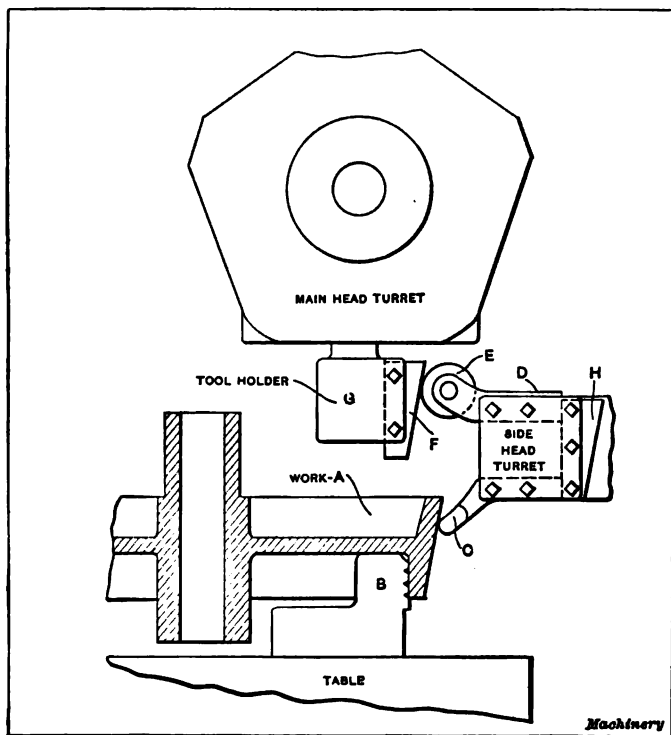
Makeshift Taper Arrangement for Emergency Vertical Turret Lathe Work
